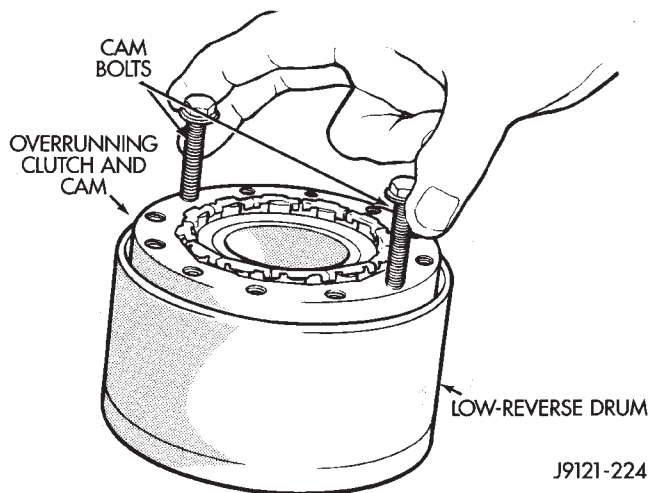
Removing Overrunning Clutch From Low-Reverse Drum
